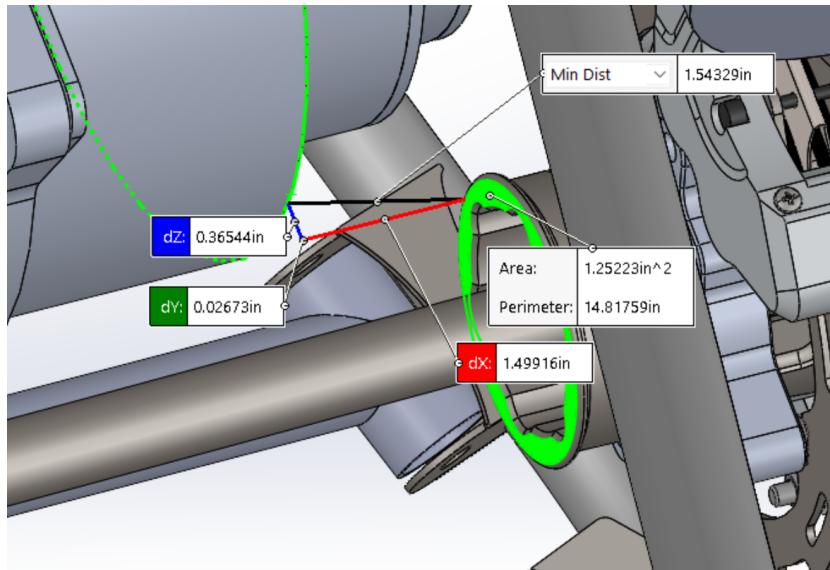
CAD Image of the Clearance to the CVT Guard From the Rear Gearbox
